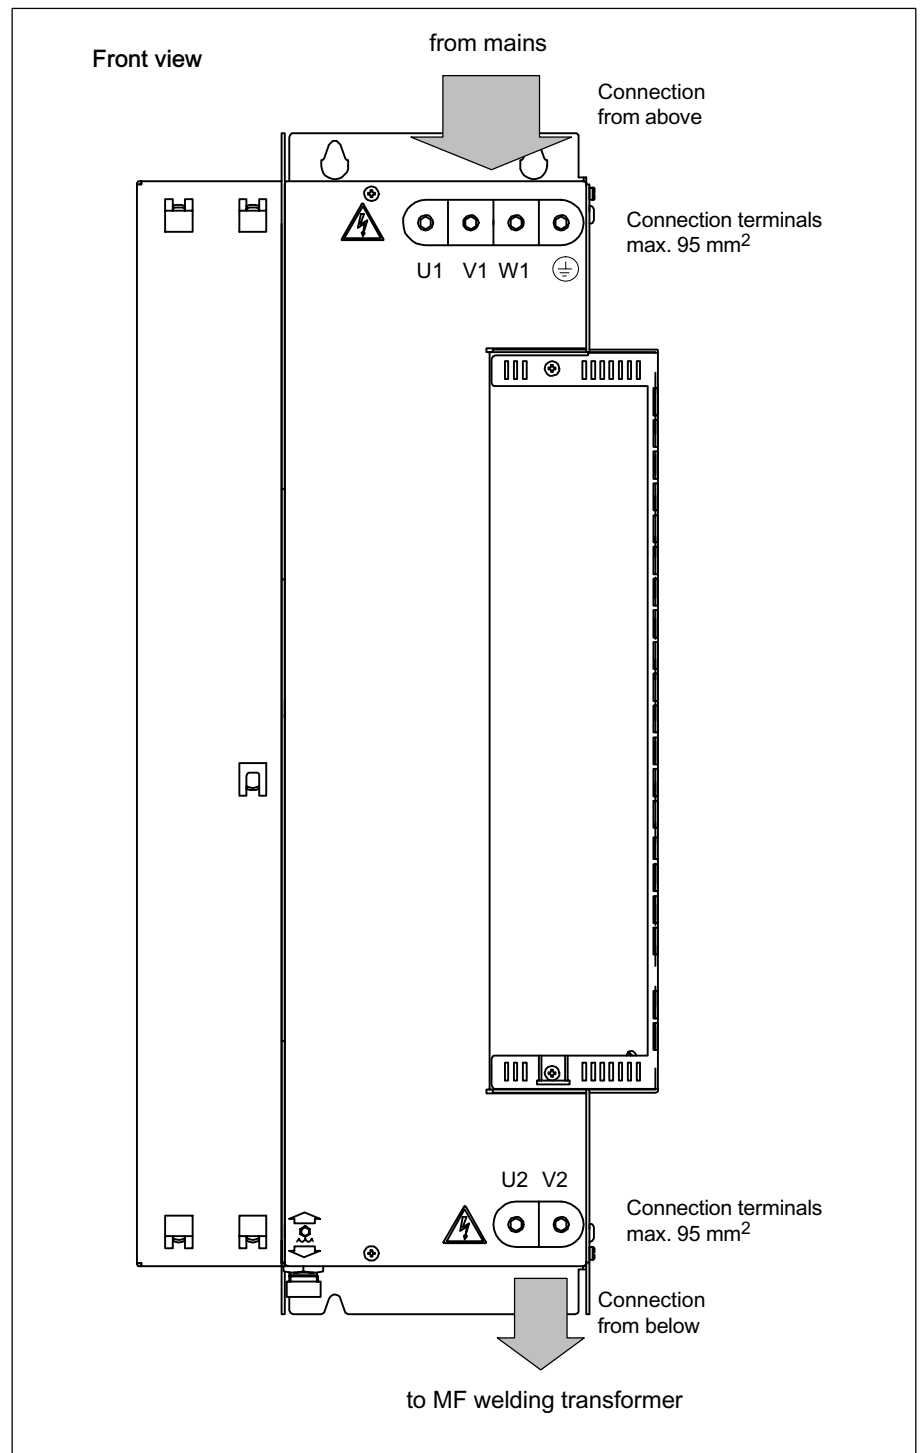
Location of mains and transformer connection: PSI 62xx.xxx W1
